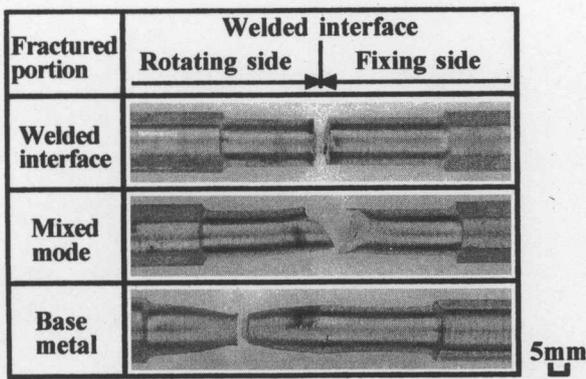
Appearance of joint tensile test specimens after testing in friction pressure 30 MPa and friction speed 27.5 s^{-1}
